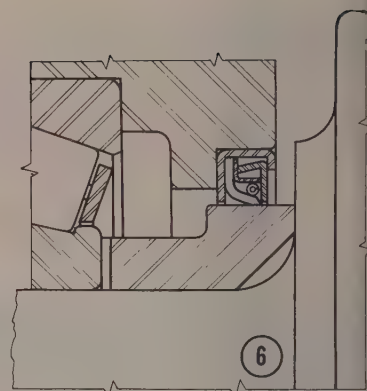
Antifriction bearing assembly of 1931 period using lip type seal. Illustrated is a single unit mounted to keep scale and water out of the bearing
